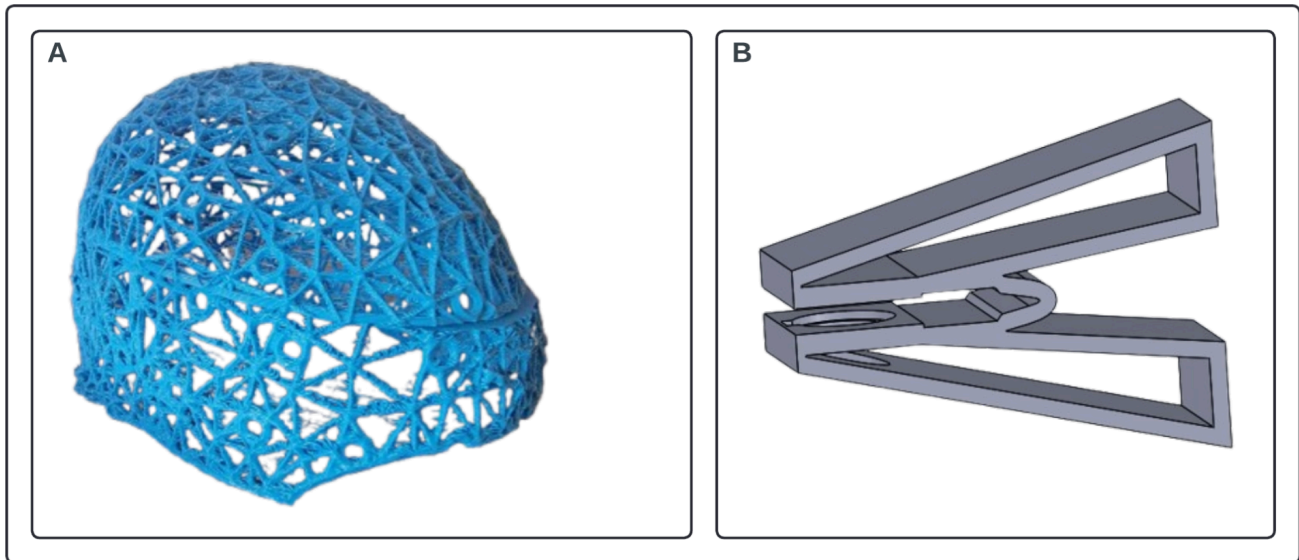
Headcap prototypes. A. Final Prototype of 3D Printed Headcap. B. Final Prototype of 3D Printed Ear Clip
